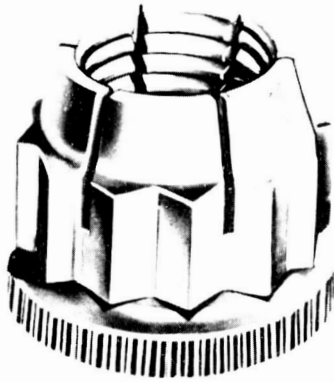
ELASTIC NUT FORGED AND MACHINED FROM ALLOY X-750
